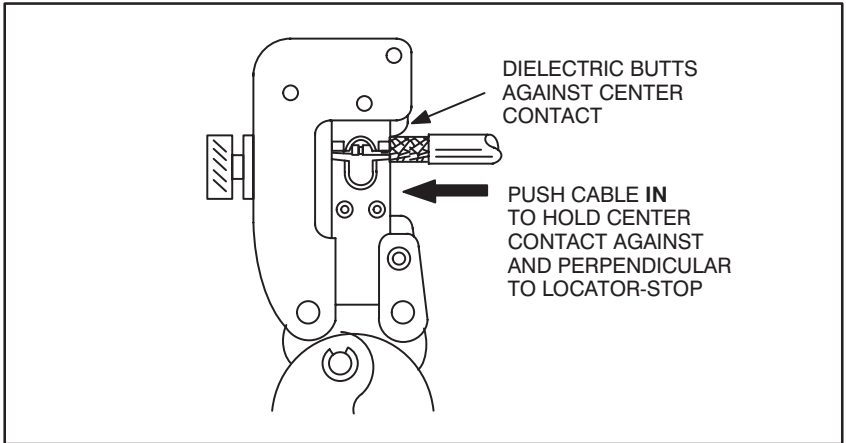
Connector Installation Step 5 for RG-11/U Cable
